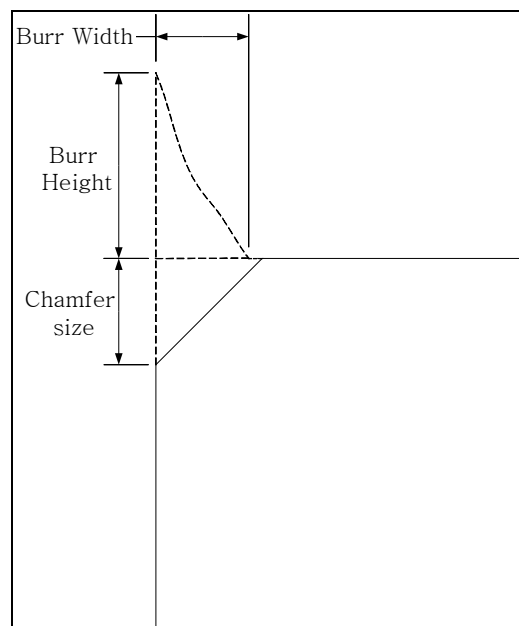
Area of Material Removed when Deburring and Chamfering
